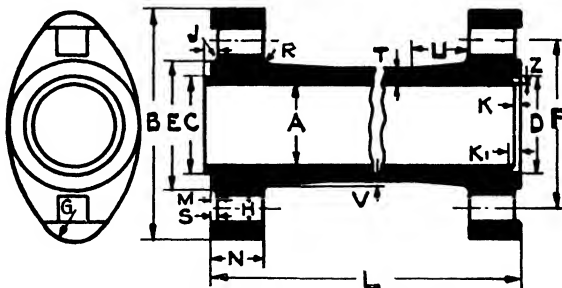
British Standard Hydraulic Power Pipes: Flange Type 1.
